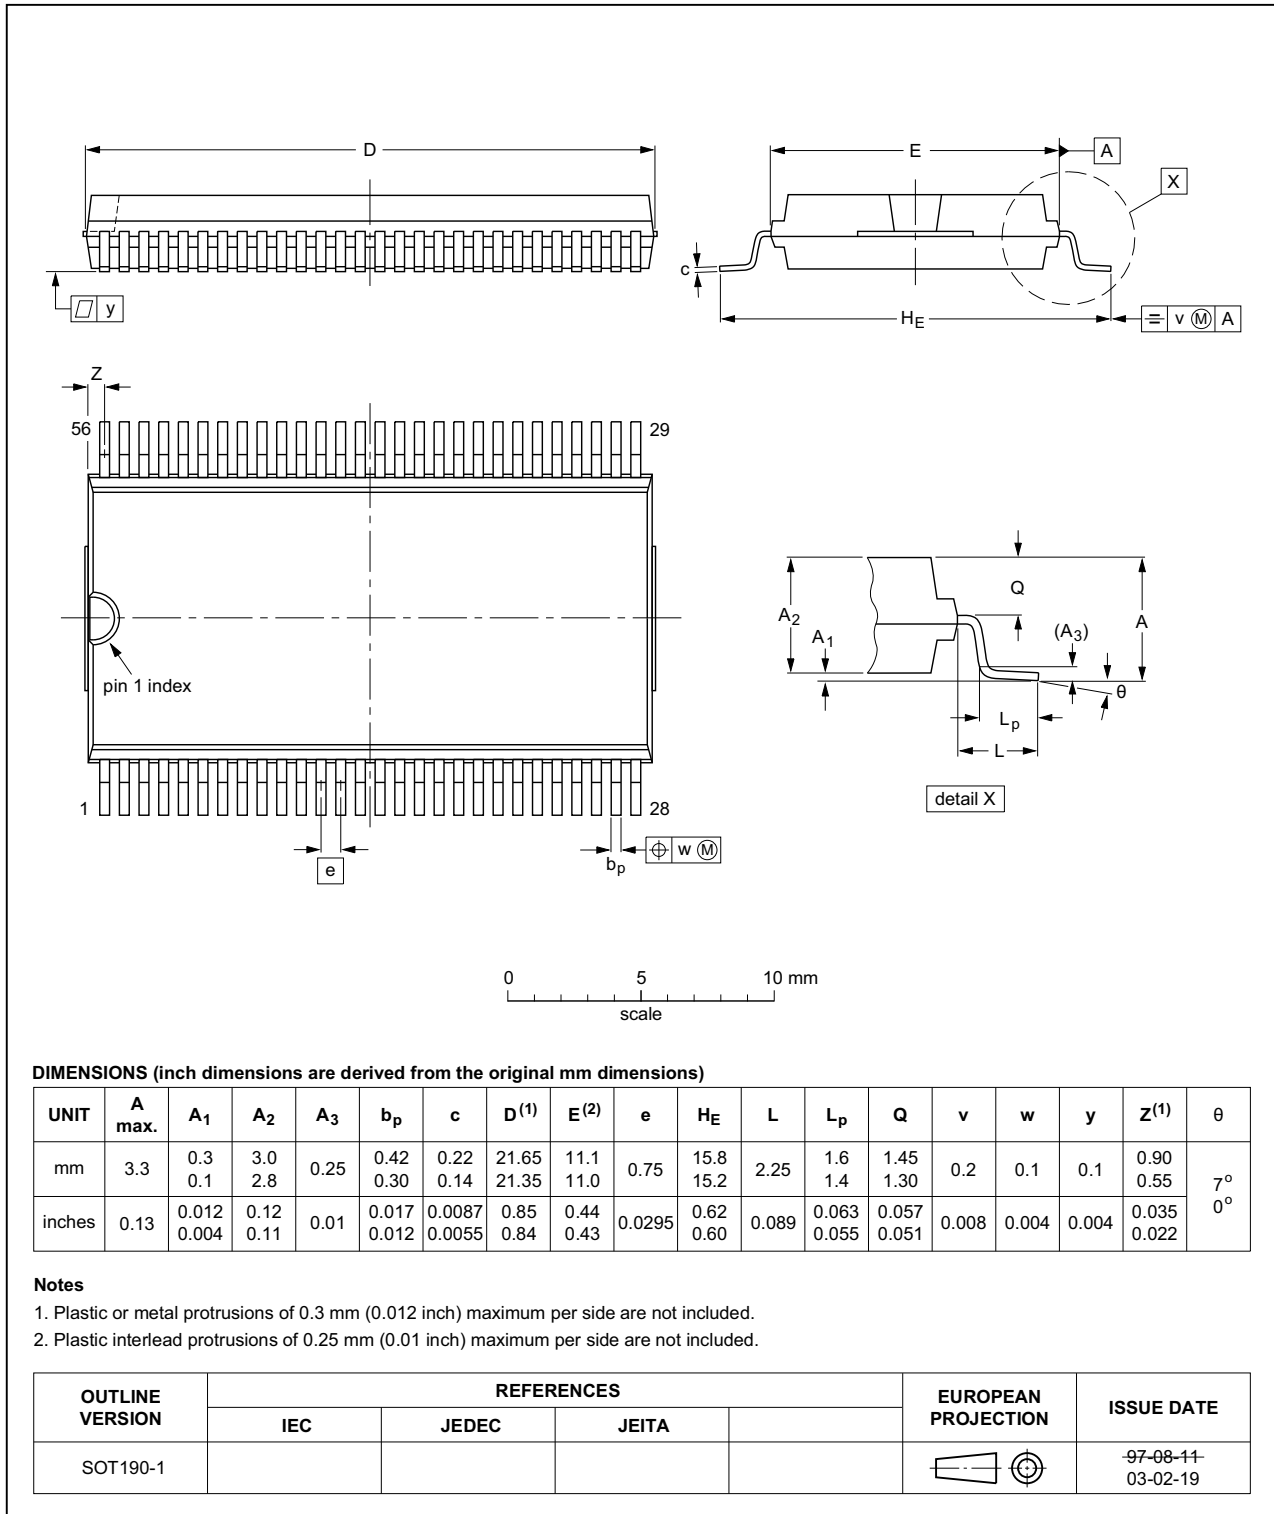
Package outline SOT190-1 (VSO56) of PCA8576C/T1
